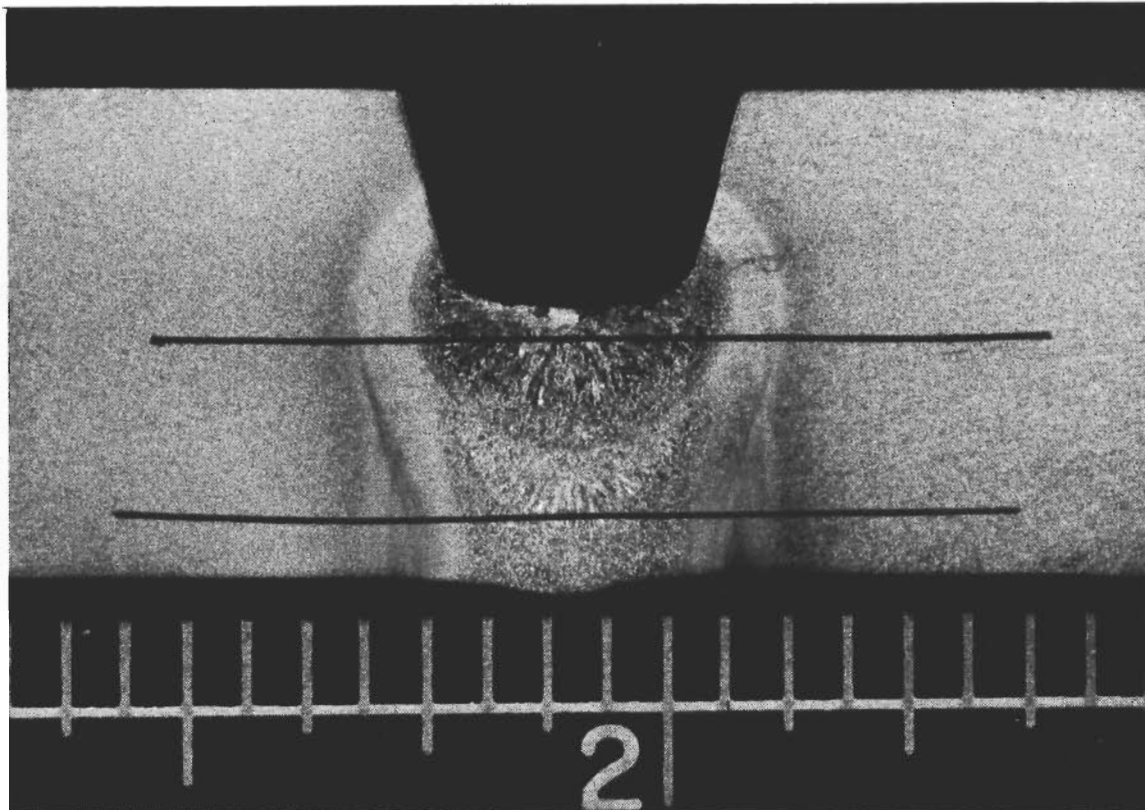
Typical Results of Microhardness Evaluations of Grade 250, 1/2-In.-Thick, 18% Nickel Maraging Steel Plate Weldments Using TIG Process, As Welded with Three Weld Passes, Heat 120D163, Filler Wire 7C-093
